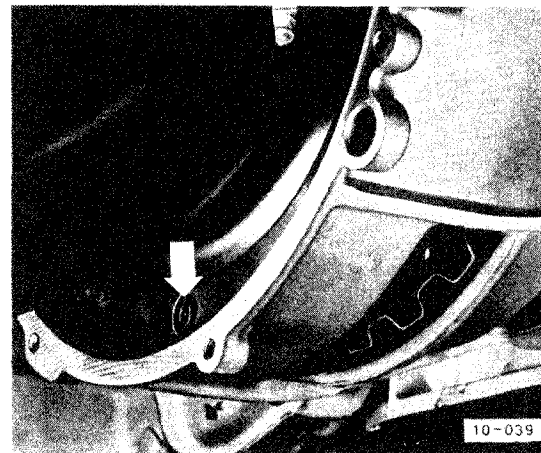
One of three bolts (arrow) that hold torque converter to drive plate. Use crankshaft pulley bolt to turn engine for access to bolts.
